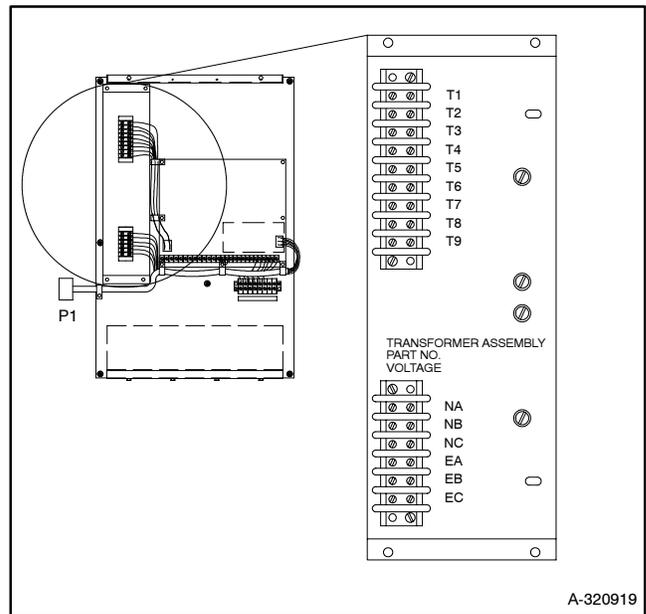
Typical Transformer Assembly and Location on the Inner Panel
